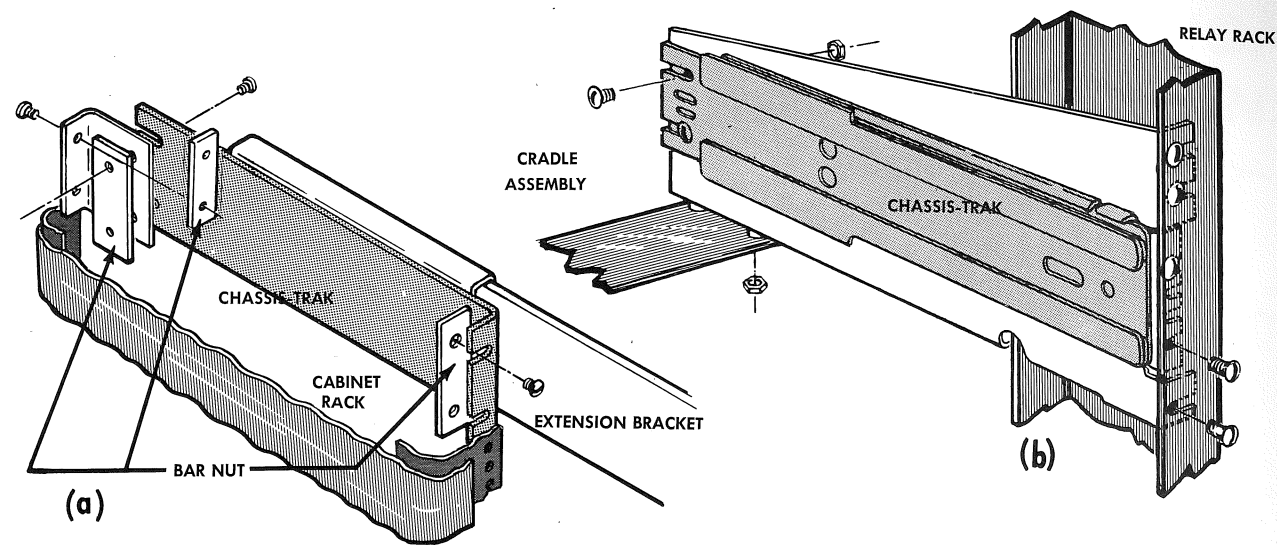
Mounting the Chassis-Trak slides. (a) The Chassis-Trak installed in a cabinet rack. (b) The Chassis-Trak installed in a relay rack.
